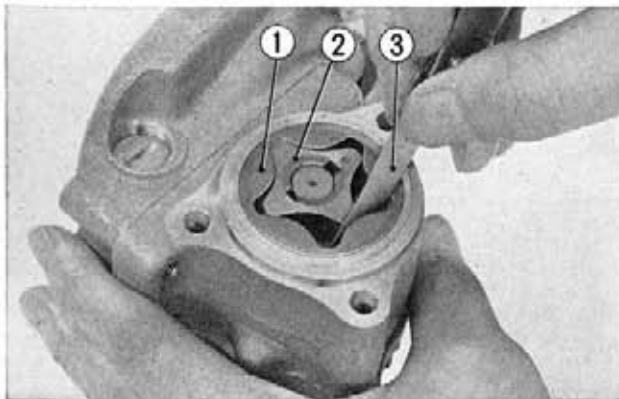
① Outer rotor ③ Thickness gauge
